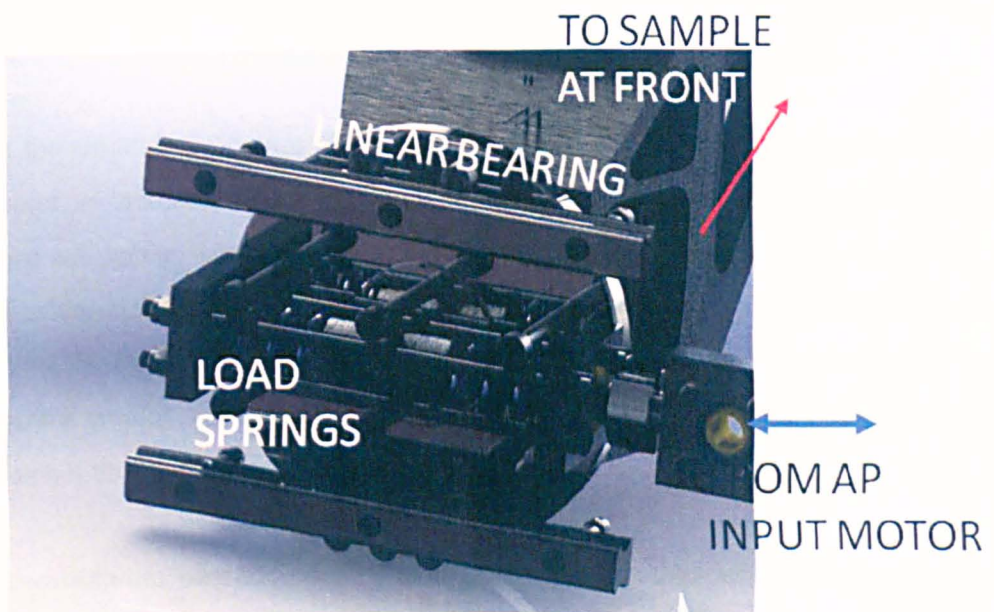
Schematic showing assembly of the AP load application mechanism – the two springs give anterior and posterior force
